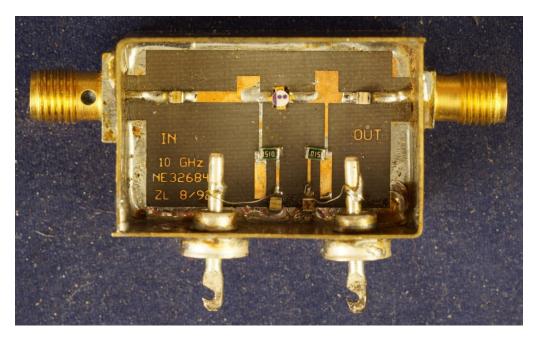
Amplifier assembly wrapping thin brass around PC board and soldering perimeter
